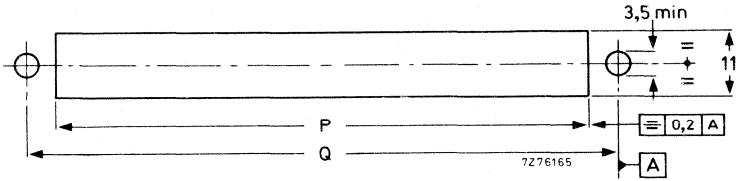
Panel cut-out; see Table 3 for dimensions P and Q.
